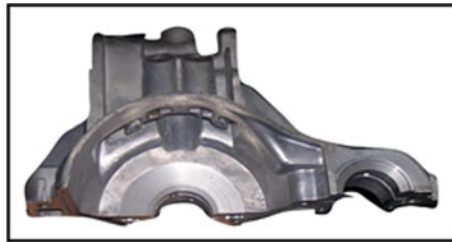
The 3-D geometry model of power steering column layout resembles the actual mould condition. Mould dimension is 1117 mm (length) × 650 mm (width) × 650 mm (thickness)
